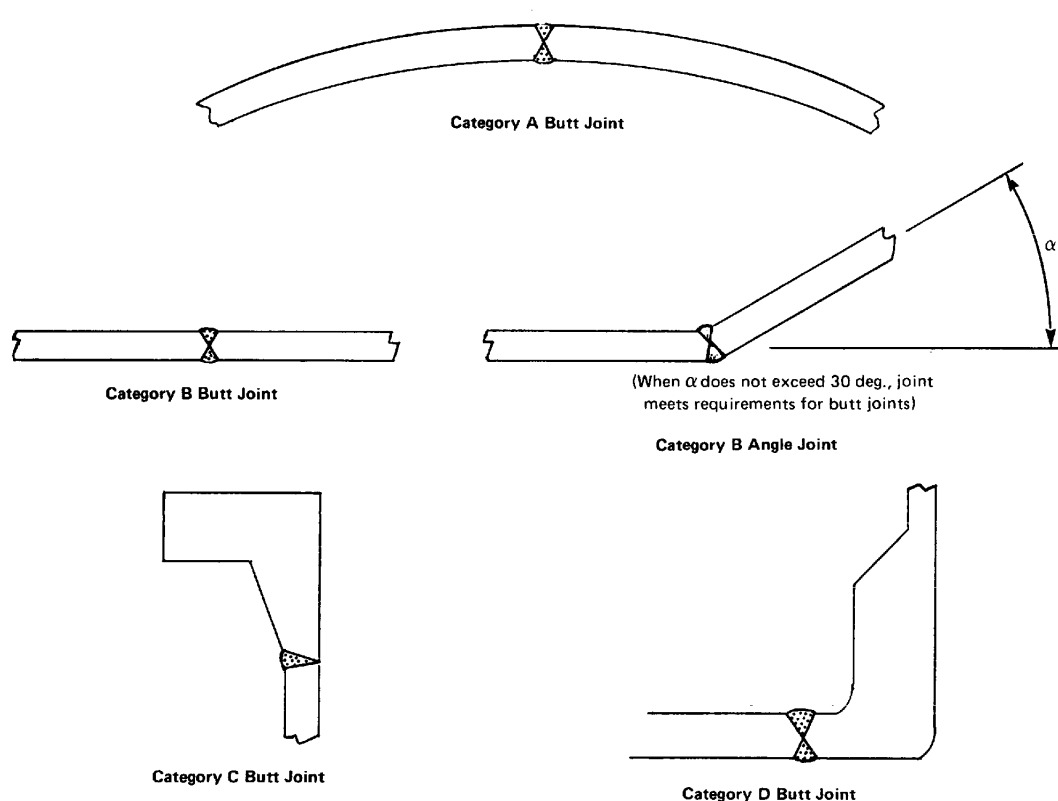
TYPICAL BUTT JOINTS
